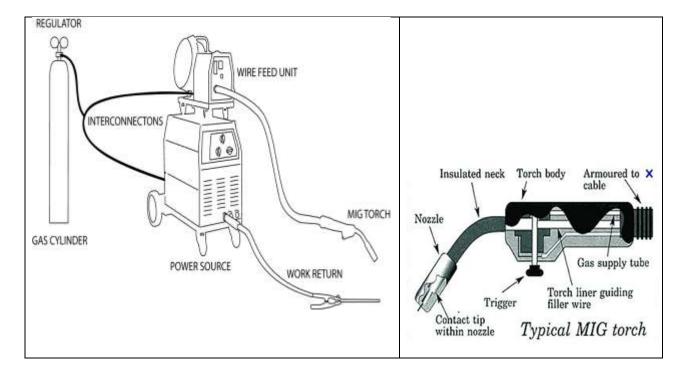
A Typical MIG welding setup & MIG Torch
